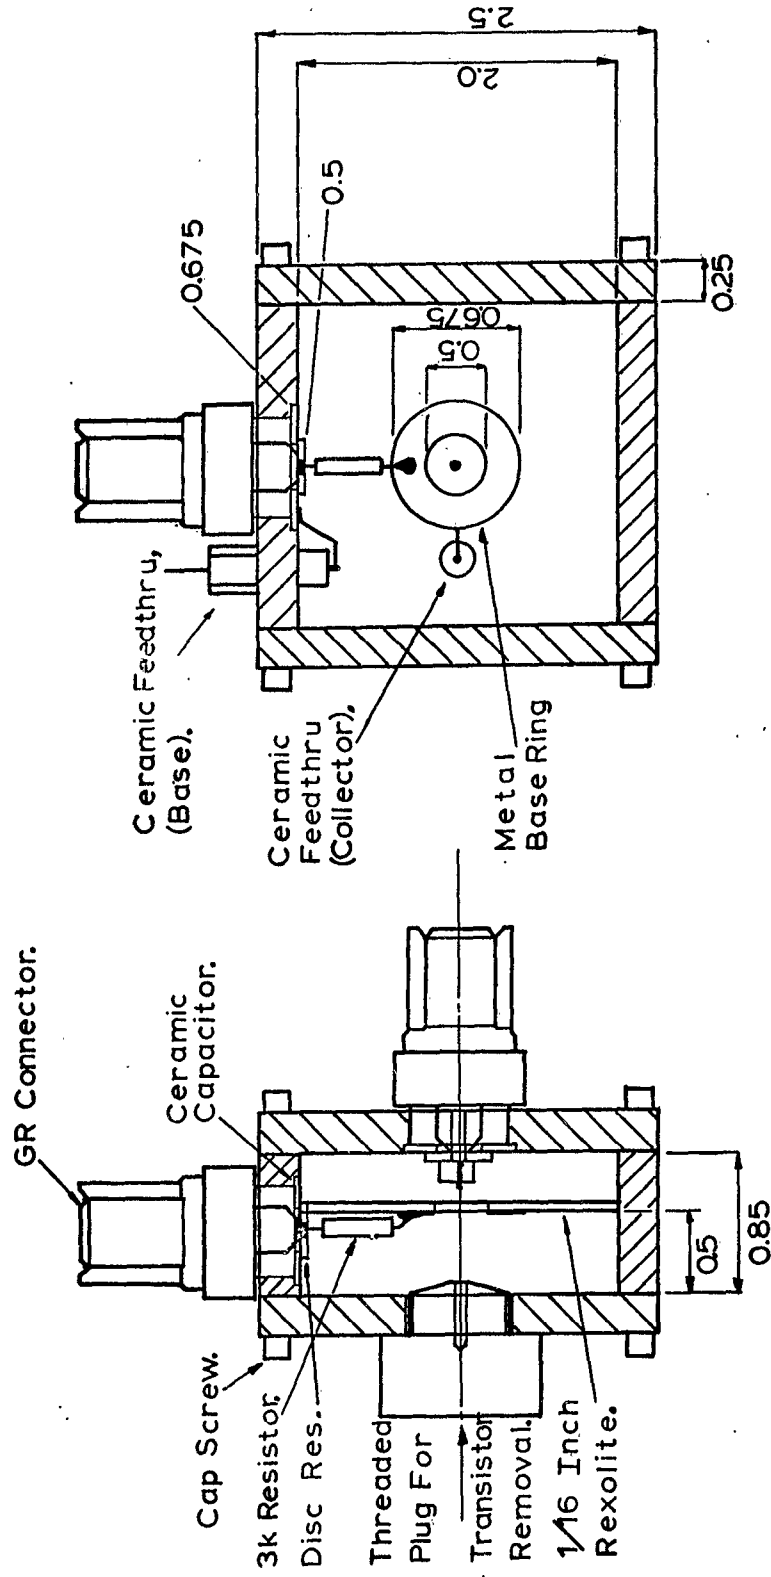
MECHANICAL DRAWING OF THE f_T JIG
